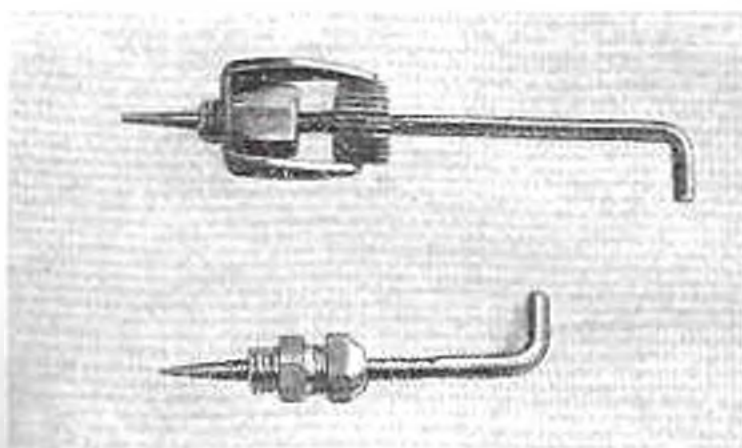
Old type McCoy needle assembly (top). New and improved type fitted to the latest Redheads (bottom).
